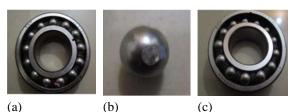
(a) Inner Race Crack (b) Spall on Ball (c) Outer Race Crack
